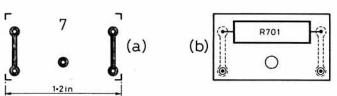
Board (PCB7) for mounting heater dropper resistor. (a) Etching. (b) Assembly
